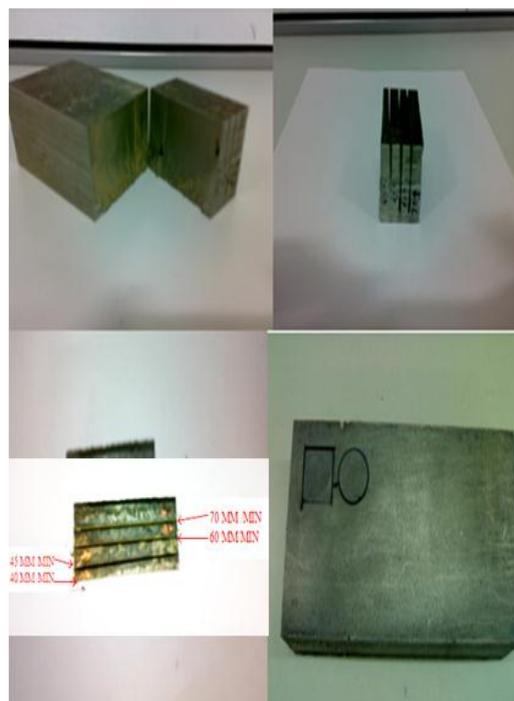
Waterjet cutting on a sample piece with various cutting speeds.
